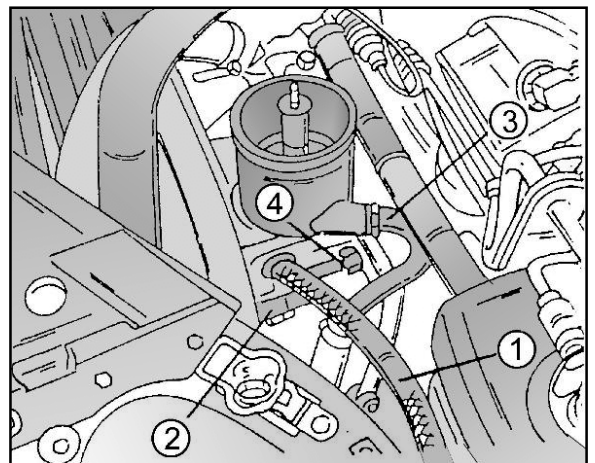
The hose connections on the steering pump and the tandem pump.
